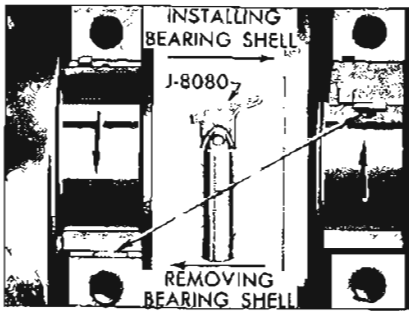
Removal and Installation of Crankshaft Bearing Upper Shell
